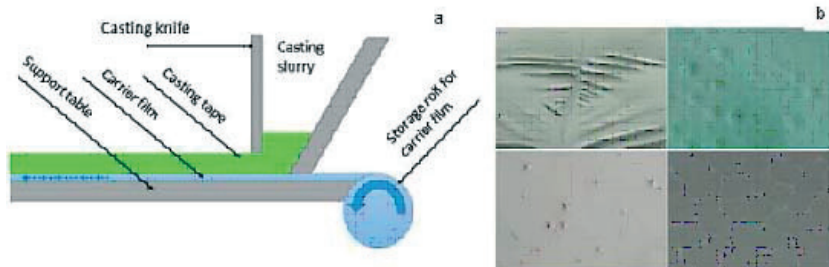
Principal scheme of tape casting technique (a) and CEM images of examples of the casted tape defects (b).
